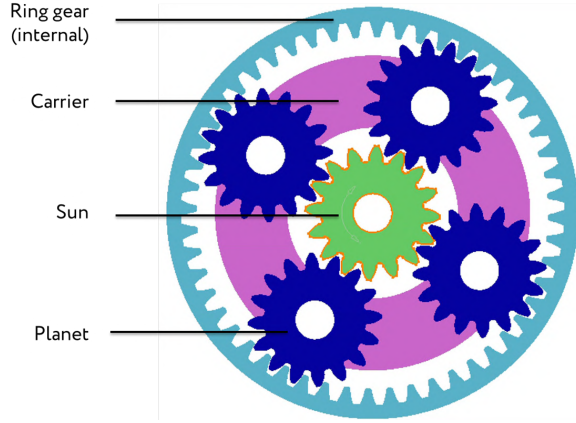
Front view of a single stage of a differential mechanism with its main components: sun gear, ring gear, carrier, and planet gears. In the design, each stage receives its input from the sun gear and distributes it to two outputs on the ring gear and the carrier.
